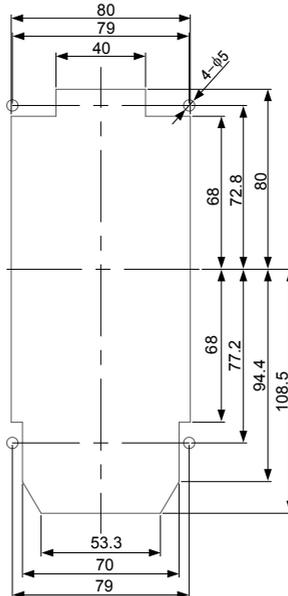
Sheet metal slot dimensions (unit: mm)
